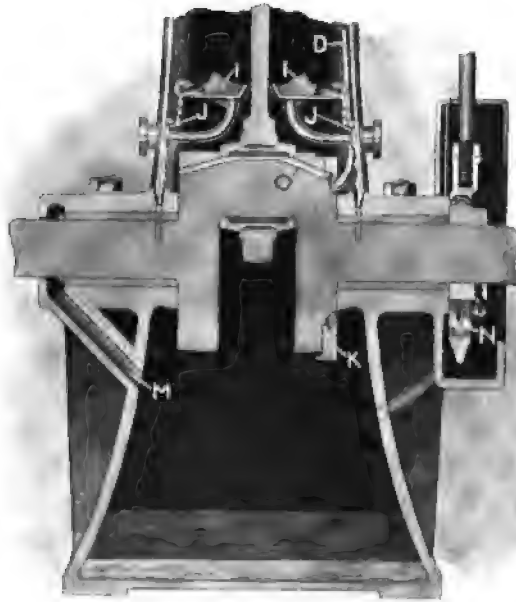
SECTION OF BASE OF THE AMERICAN BLOWER COMPANY'S ENGINE SHOWN IN FIG. 3, ILLUSTRATING METHOD OF OILING THE CRANK-PIN, JOURNAL BOXES AND ECCENTRIC
